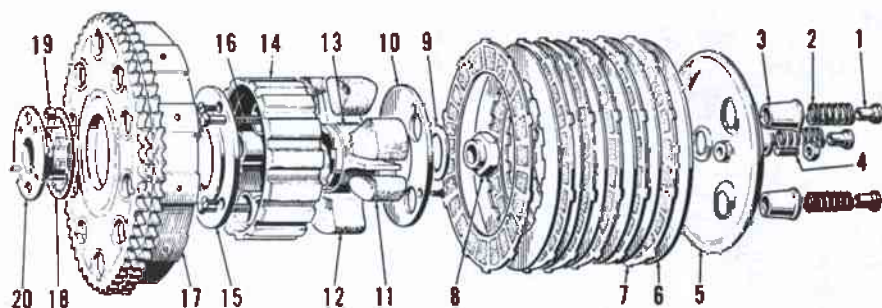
Exploded view of the clutch assembly. Refer to Fig. TM3-28 for installation of rubber cushions (11 & 12).
